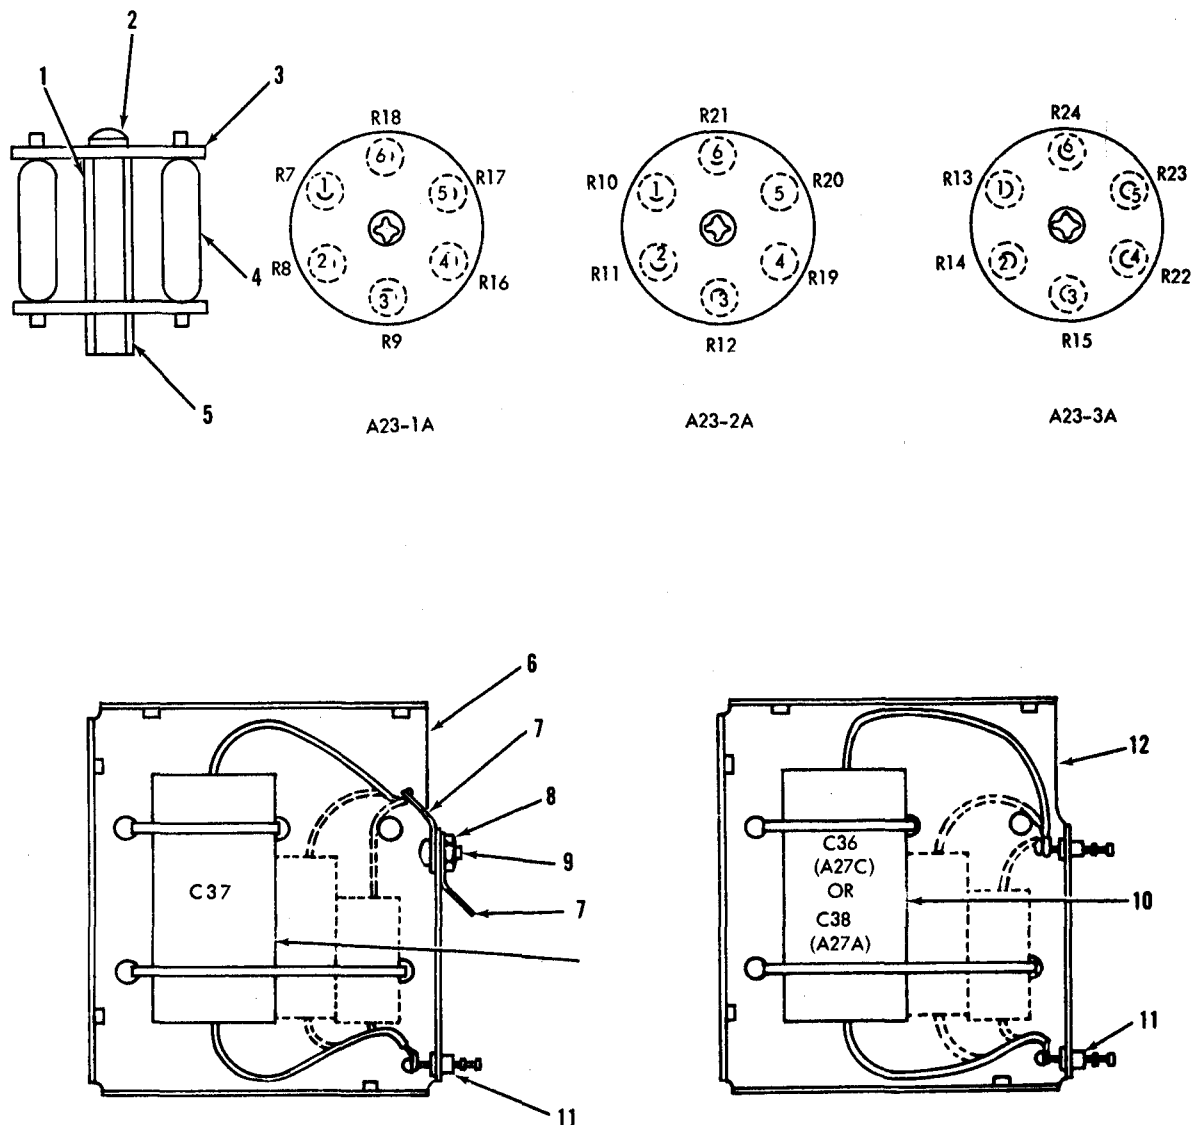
②. Inverter Assembly A2 (sheet 2 of 2).
